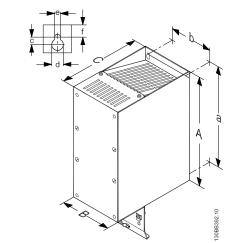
IP20 Wall Mounted Foot Print Filters
